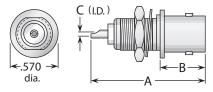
(Front mount, pressurized [nonhermetic], with mounting gasket)
